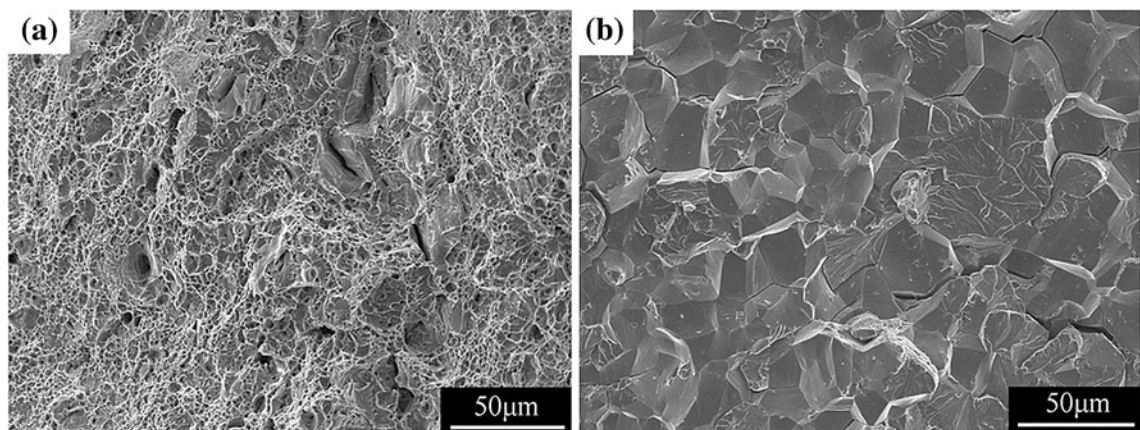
Fracture surfaces of the (a) TMT2 steel and (b) TMT3 steel.
